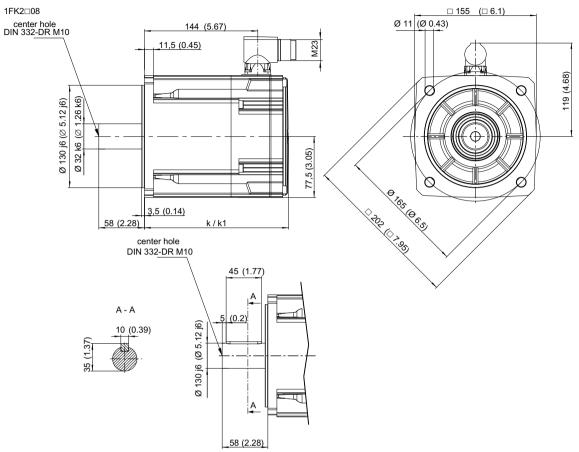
Dimension drawing_1FK2208-3AF00_OCC
